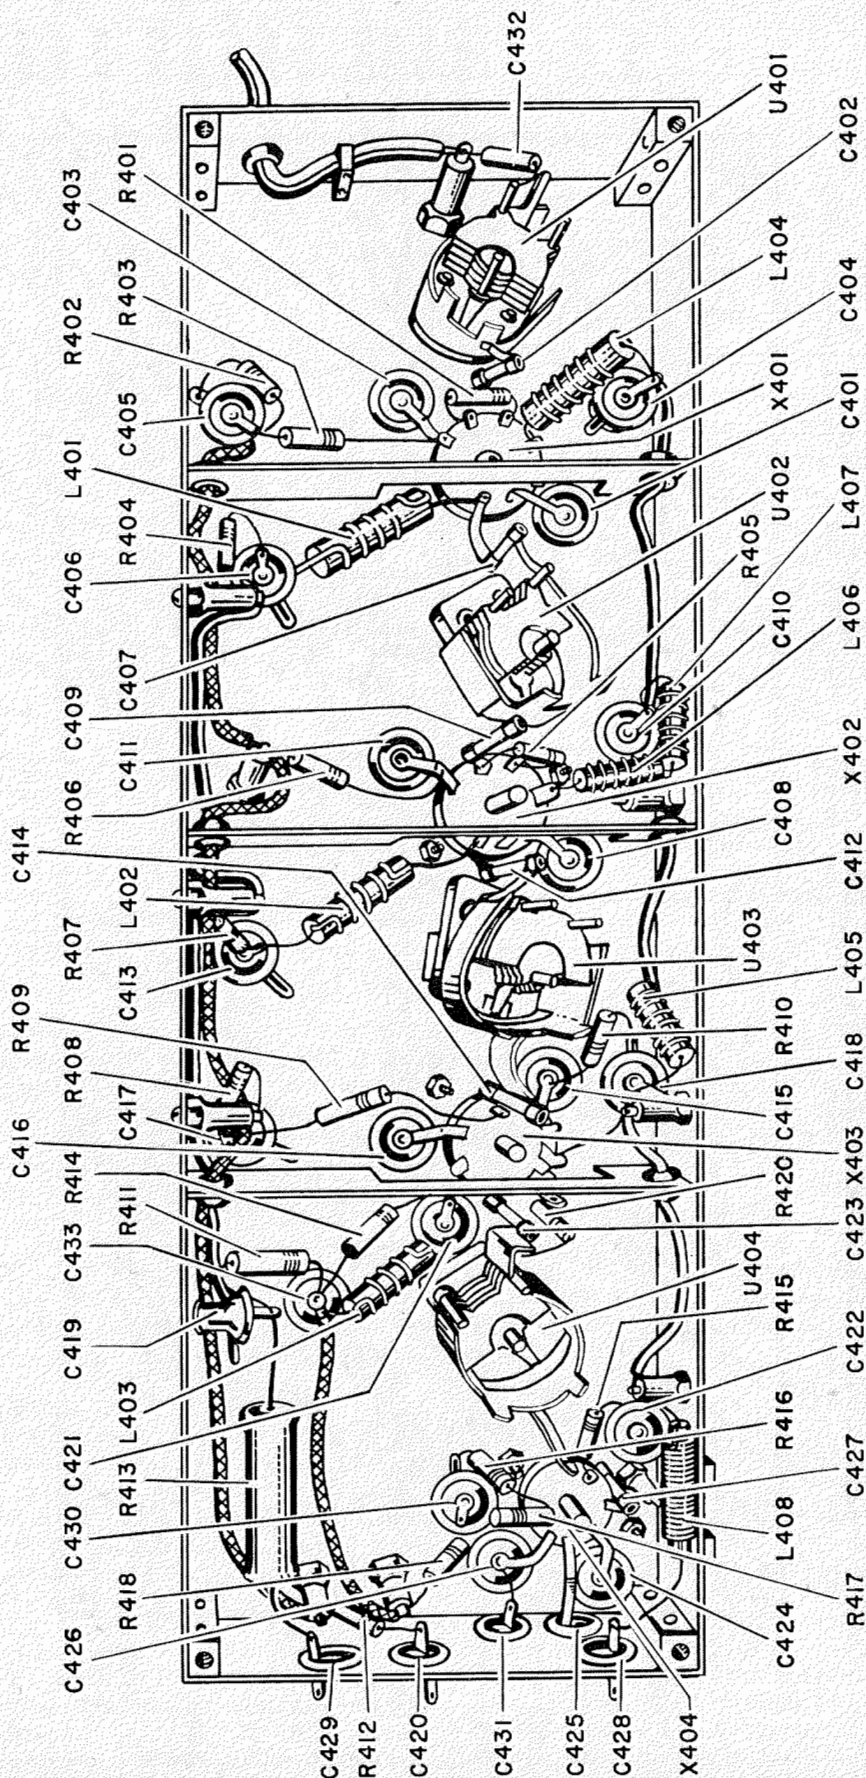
Radio Receiver R-361/GR, Bottom View, Location of Electrical Parts, R-F Subassembly
